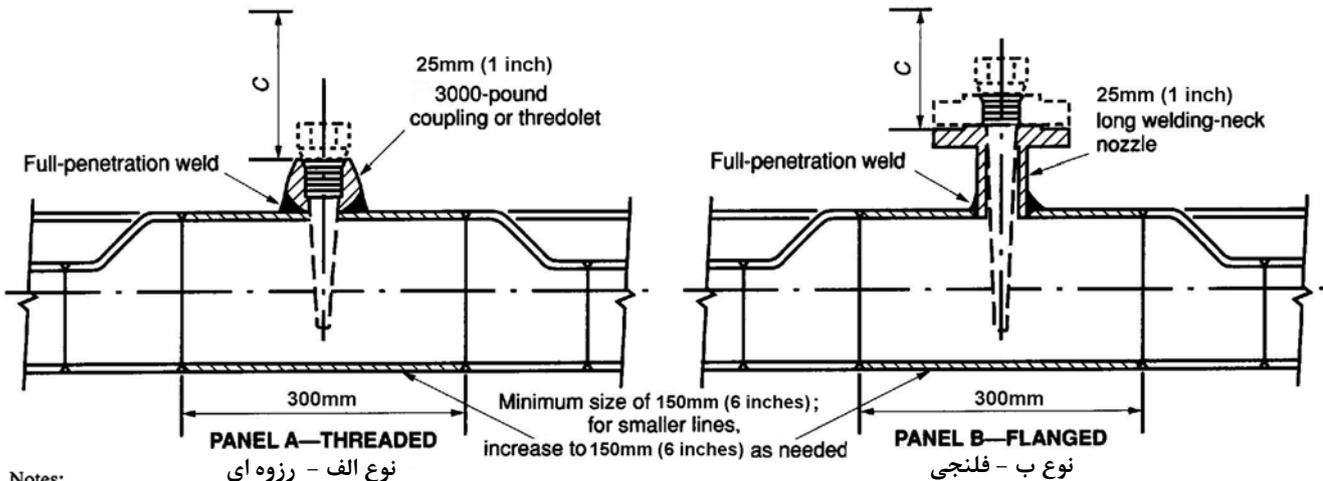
ELBOW INSTALLATION OF TREADED AND FLANGED THERMOWELLS
